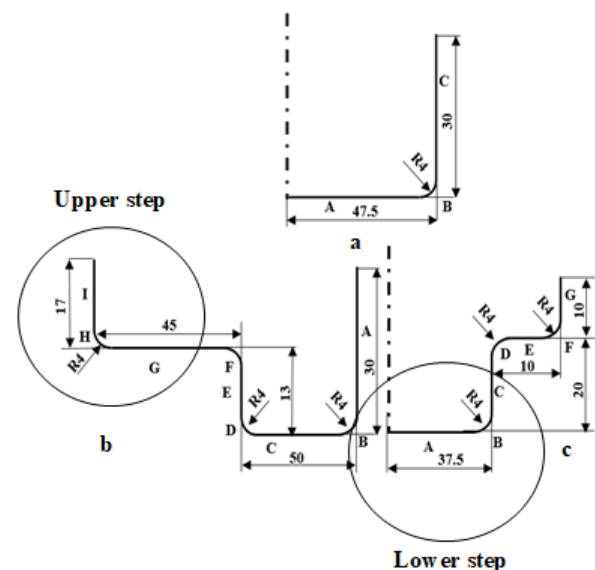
Defined geometries, a. Simple workpiece, b. Side-step workpiece, c. Middle-step workpiece
